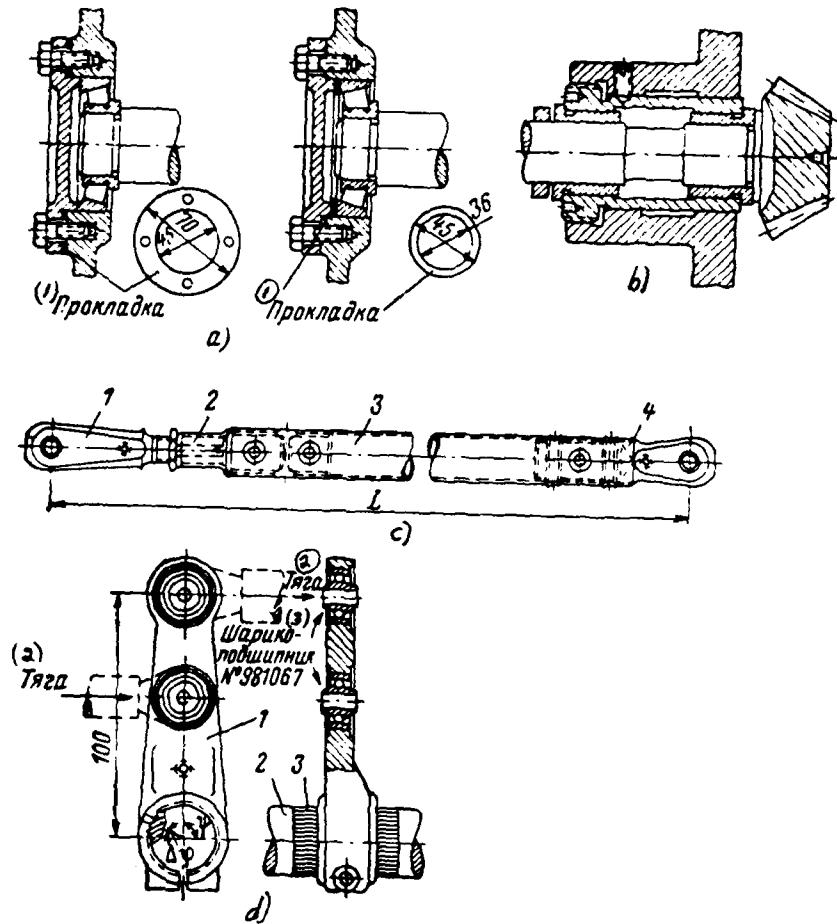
Compensators, used in assemblies and units of machinery:
